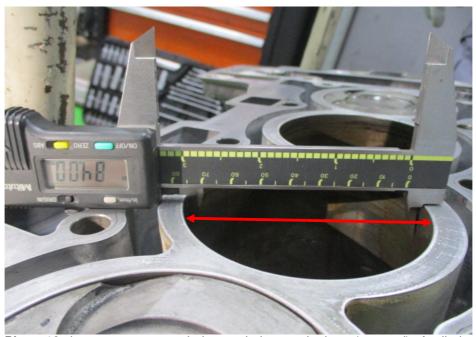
shows measurement of the stroke for cylinder 2 of the BMW engine that I had inspected.
